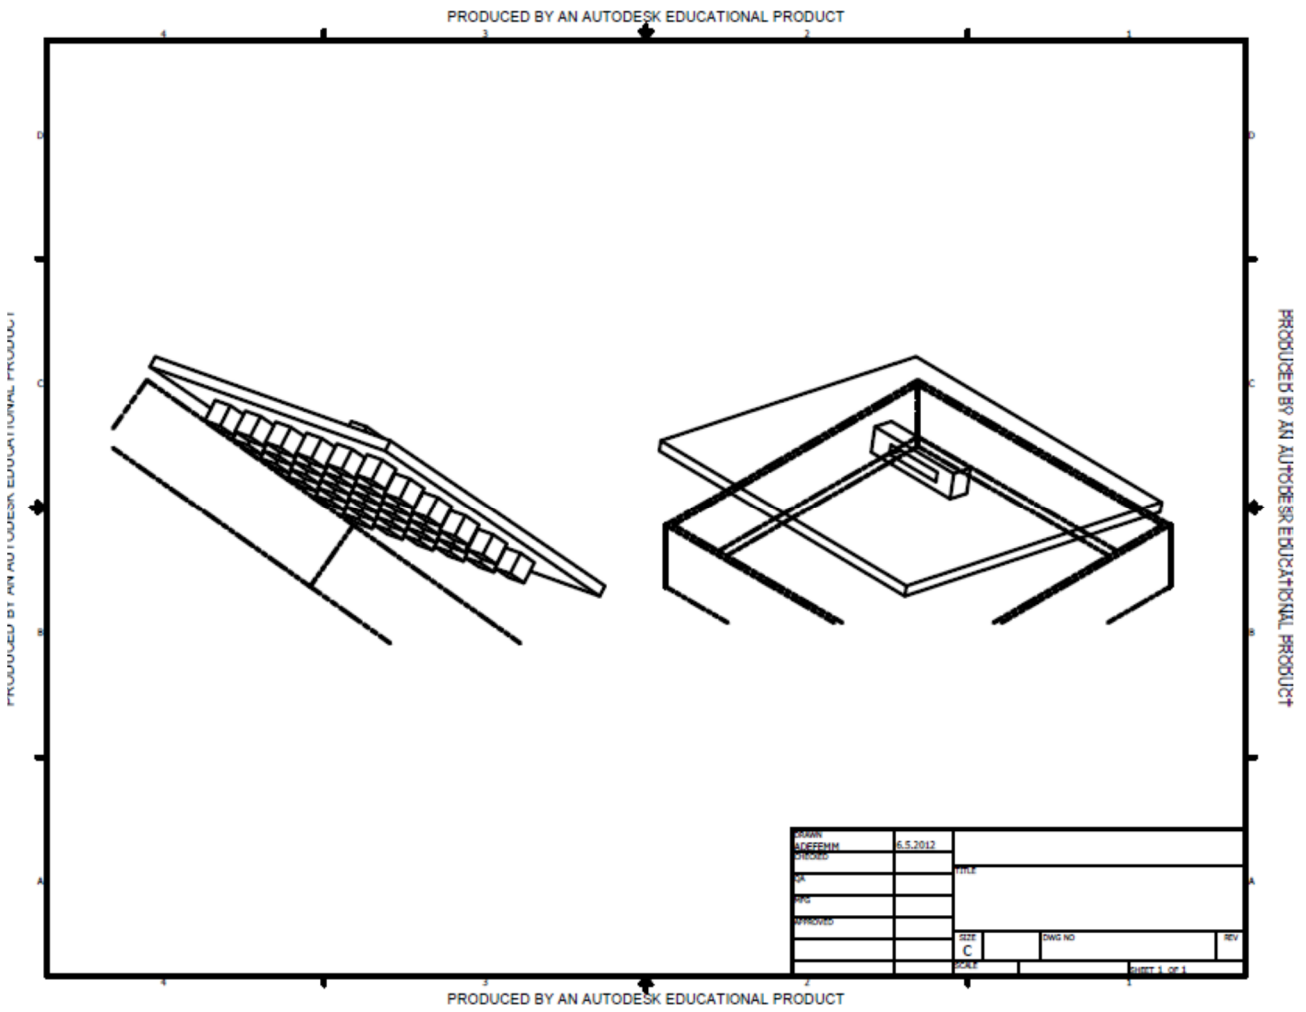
60 mm by 300 mm unit concrete paver before improvement
